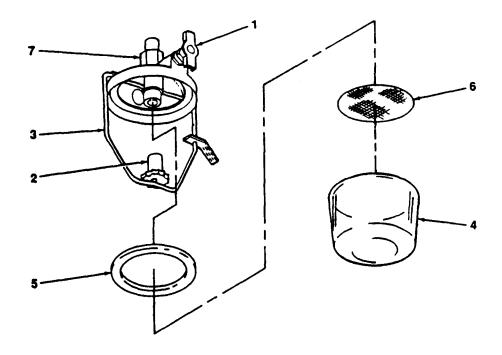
Fuel Filter, Disassembly and Reassembly.
